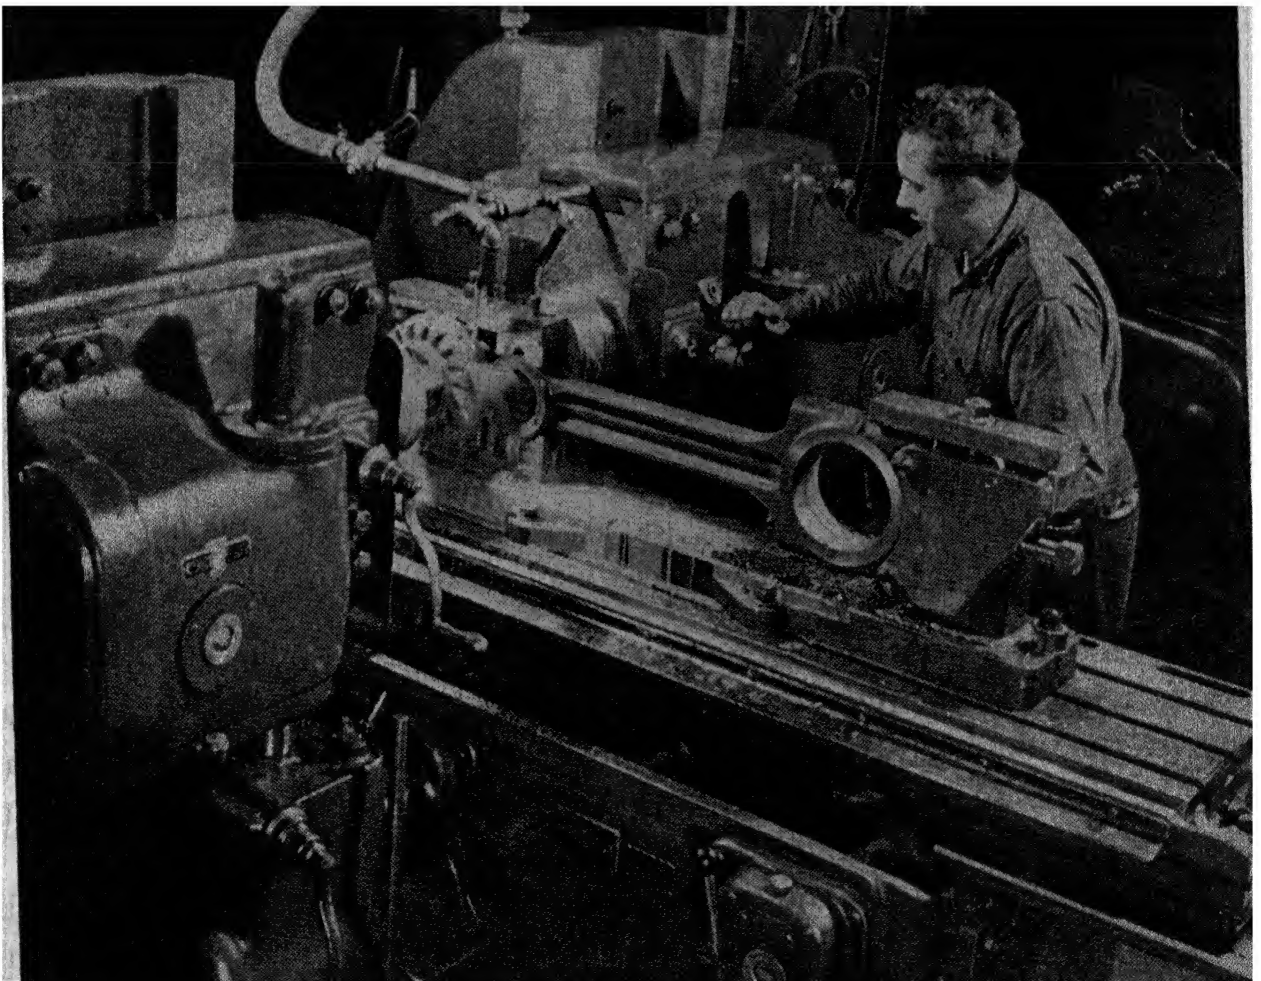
A milling machine simultaneously finishing both sides of a large Diesel engine connecting rod. The two cutters have multiple teeth, similar to a circular saw. One of them is seen at the small end of the rod; the other is just behind it.
